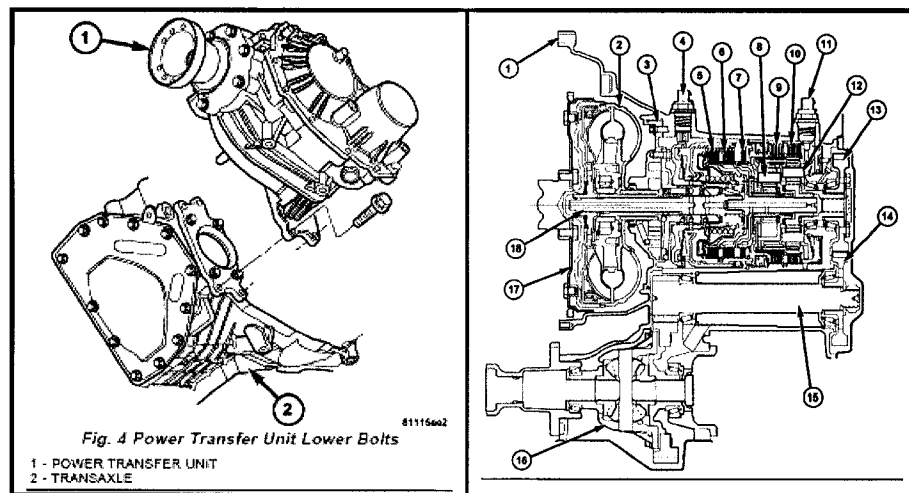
Drawings of PTU and 41AE/TE automatic transaxle (Courtesy of DAIMLERCHRYSLER Corp.)
